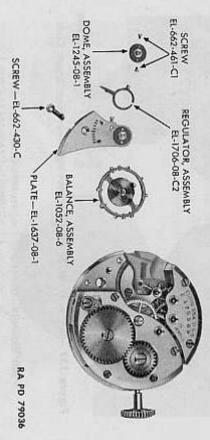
Eigin Wrist Watch — Balance Cock and Balance Assembly Removed
